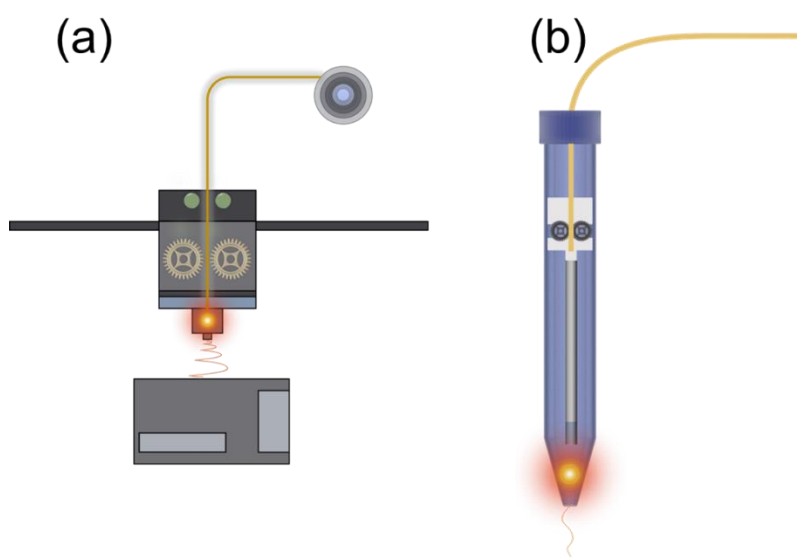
Cartoon of 3D printer printing process: (a) short range extrusion 3D printer; (b) 3D printing pen.
